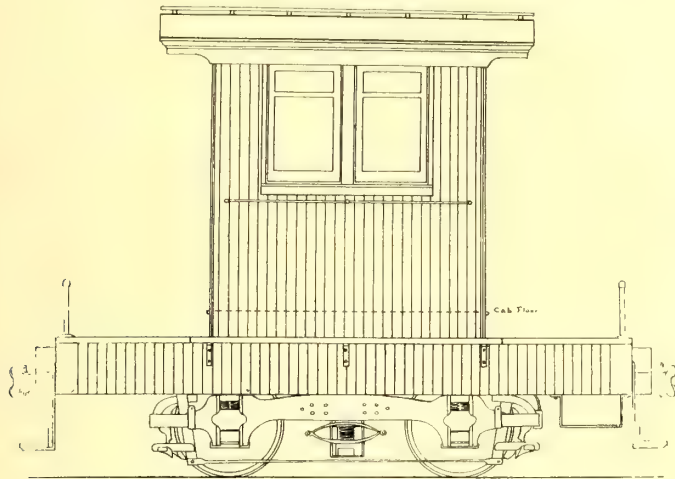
SWITCHING LOCOMOTIVE ELEVATION
